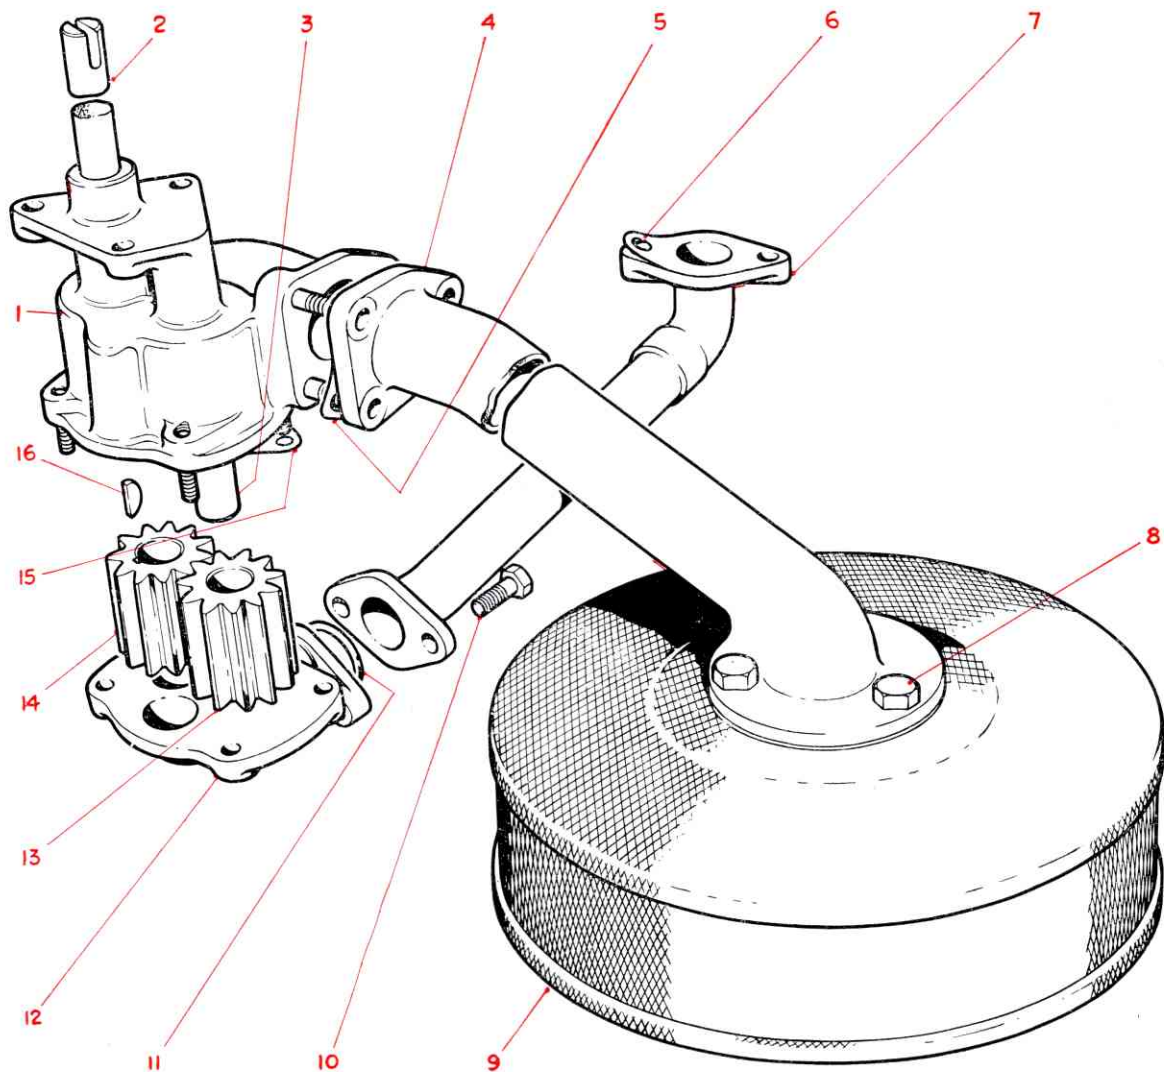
EXPLODED VIEW OF THE OIL PUMP COMPONENTS
